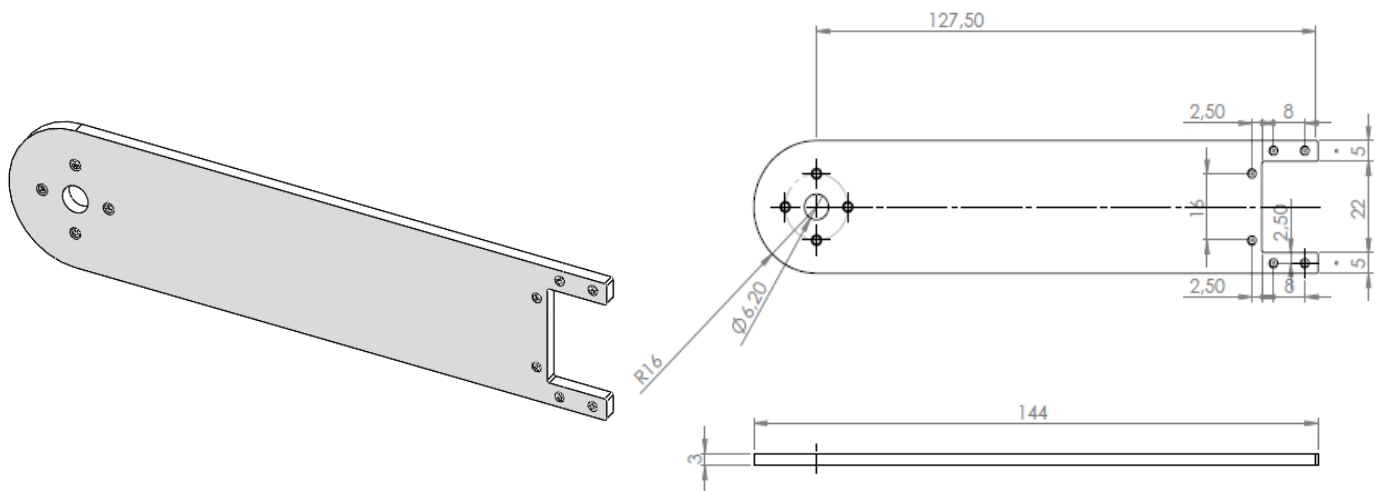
Technical Drawing and Trimetric Views of the First Arm Link
